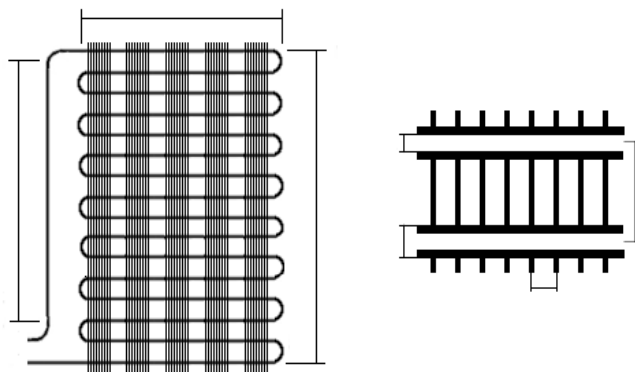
Schematic and geometrical parameters of a wire-and-tube condenser.
